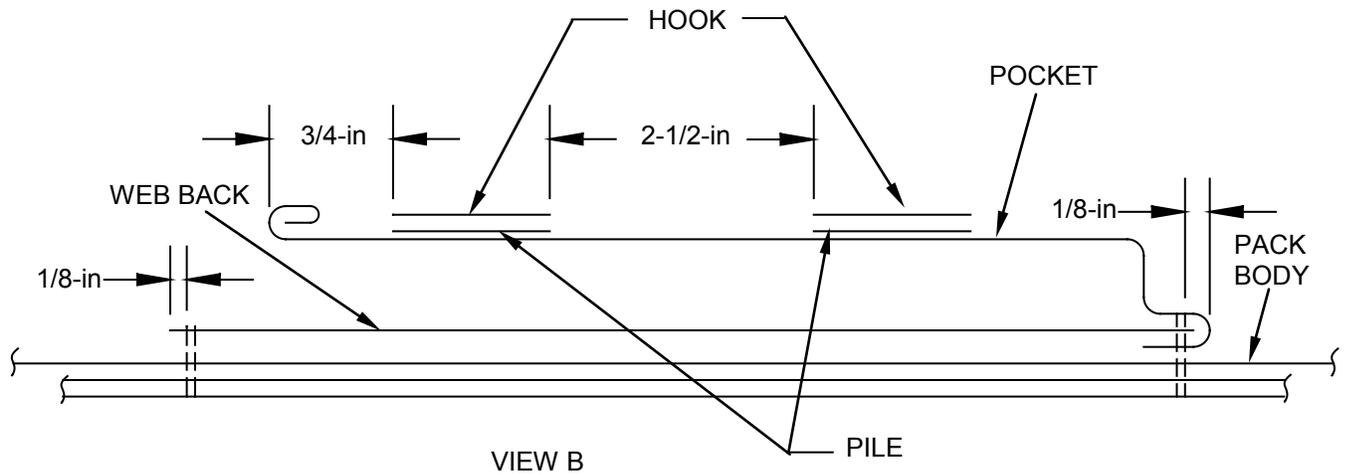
(AT4 PACK) POCKET ASSEMBLY LOWERING LINE (SHEET 2 OF 2)
